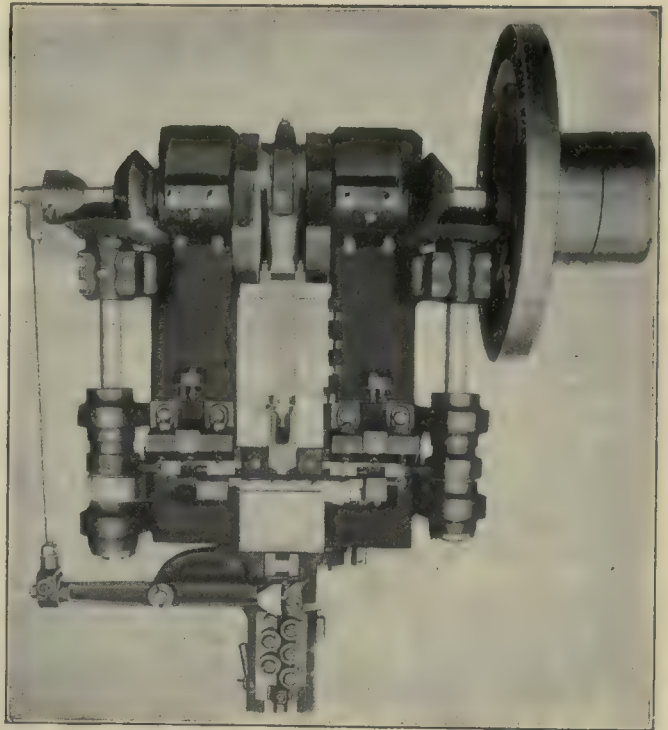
TOP VIEW OF WIRE-NAIL MACHINE
